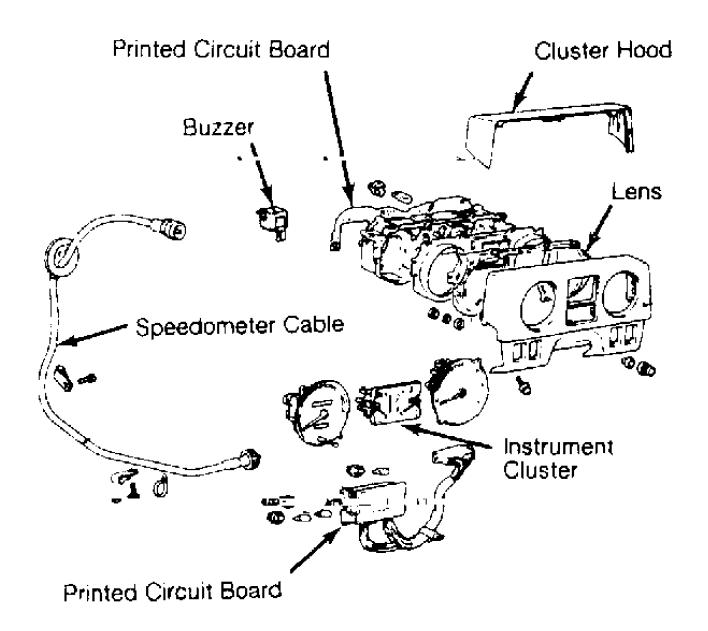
Identifying Instrument Cluster Components (Montero) Courtesy of Mitsubishi Motor Sales of America.
